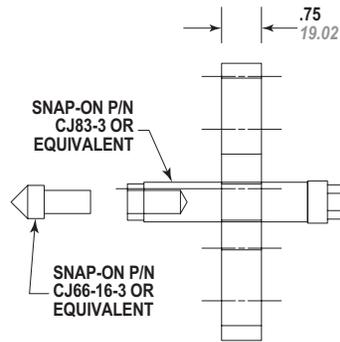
4000/5500 Gear and EP Tool (T29603)
